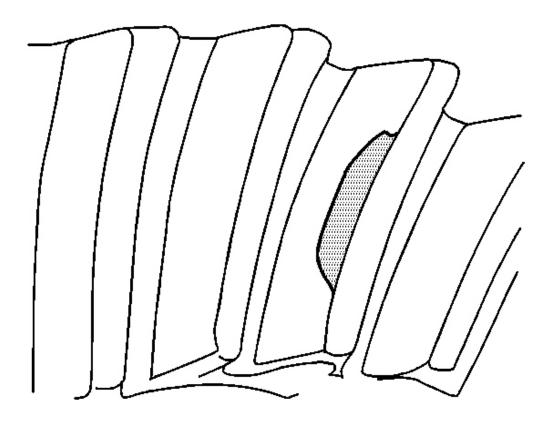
Identifying High Flank Contact Pattern Courtesy of GENERAL MOTORS CORP.
